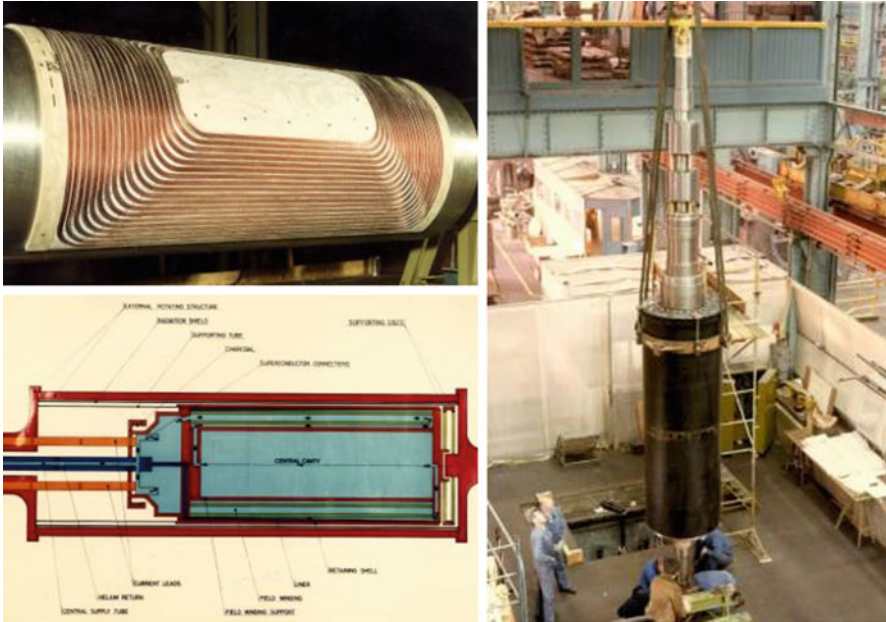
Final assembly and inspection of the Alsthom rotor (weight 15,000 kg) [8]
